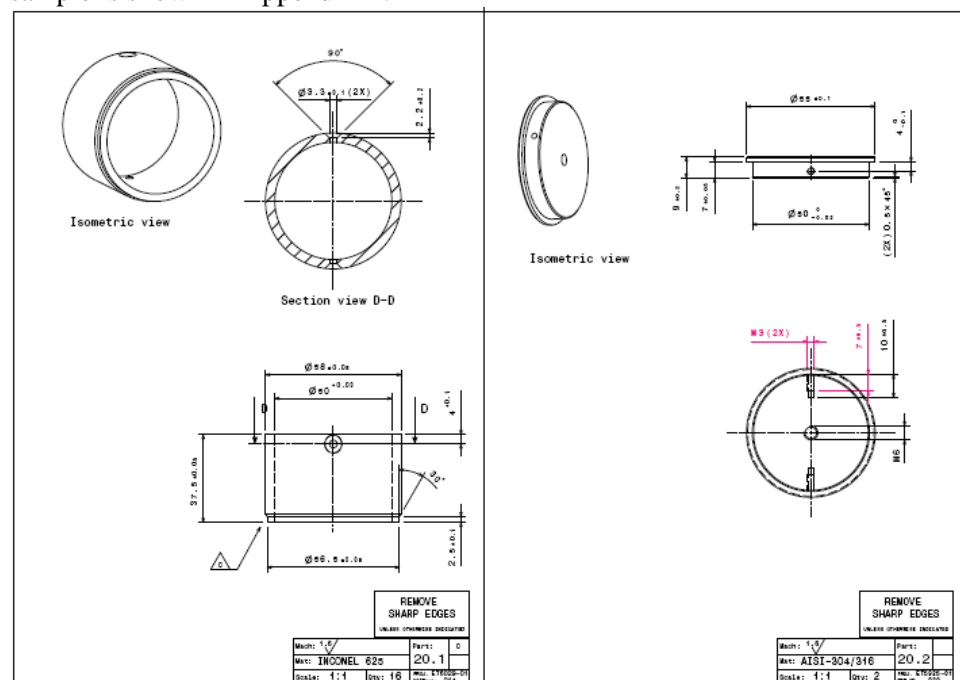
Qualification weld sample configuration (ref drawing: ET6029-01-DR-020-c-GE-ASM Heat exch welding test).
